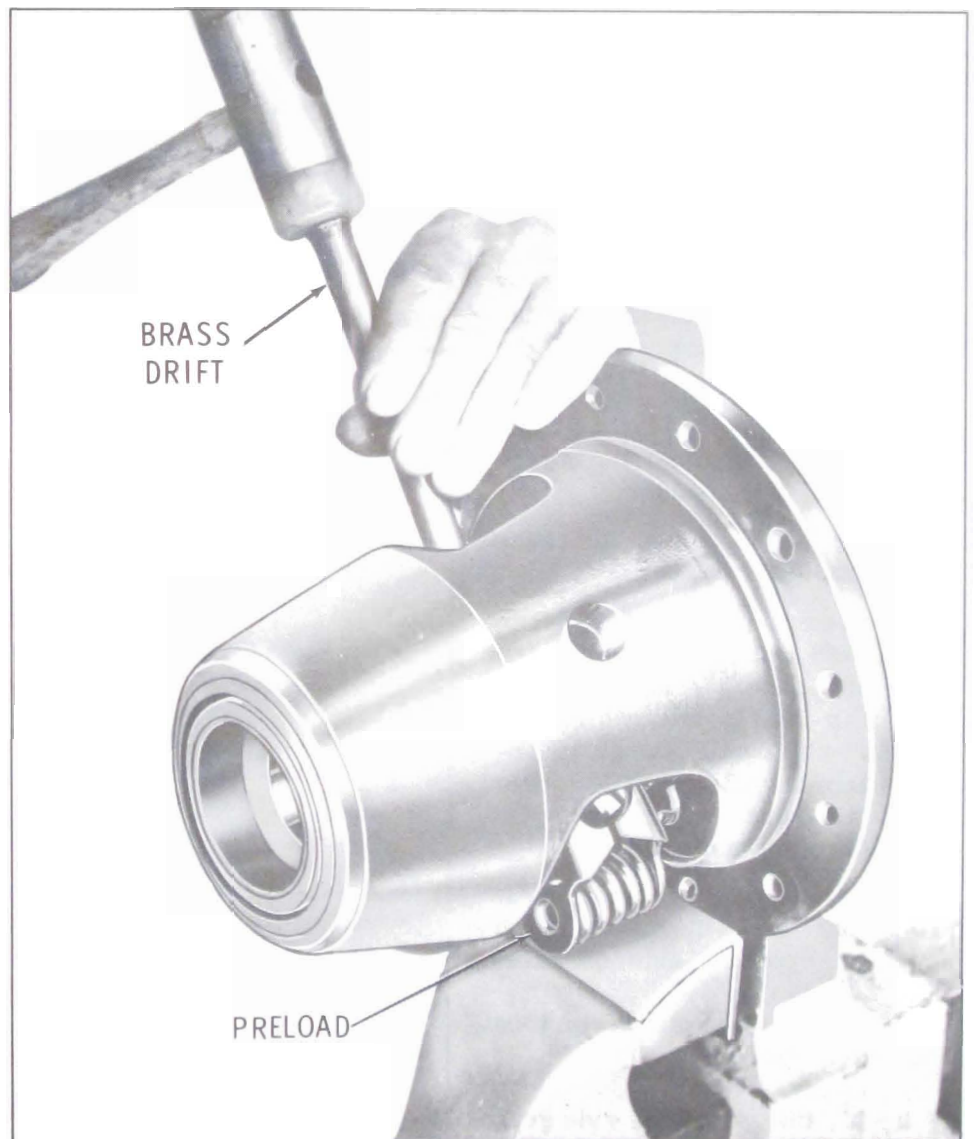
Removing Preload Thrust Blocks and Springs
